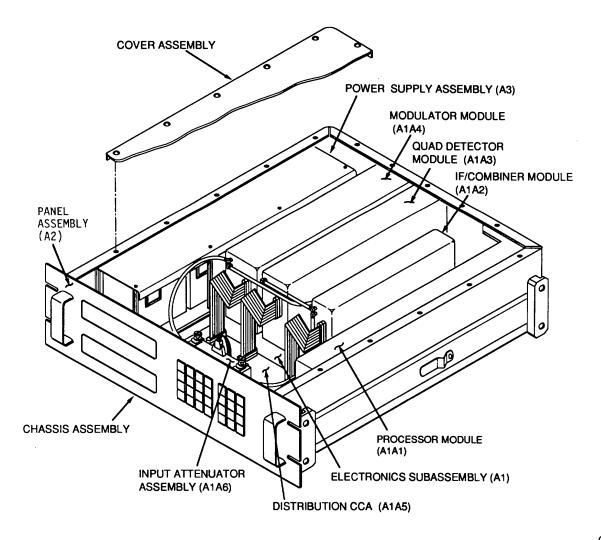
TS-4295/G Modem Test Set - Major Components
